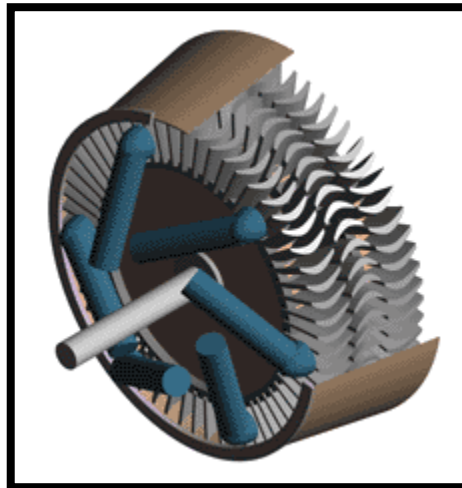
A 2-Step Steam Turbine with two Impellers and an Idler [10]
